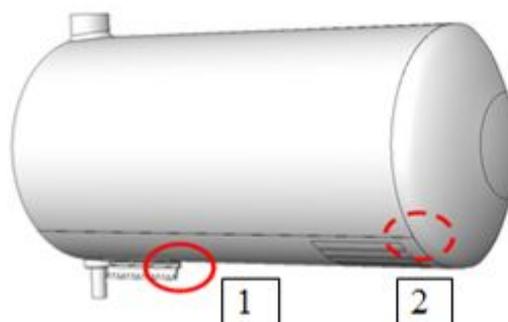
Calculation model of ¼ boiler: 1- welded joints of pads, 2 – connection of T-type joints
